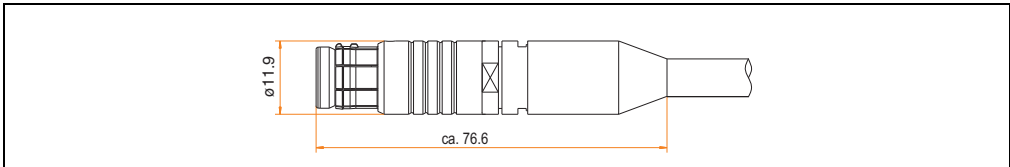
Plug dimensions (ODU Minisnap) - SDL cable 5CASDL.0xxx-30 Rev. < A5
